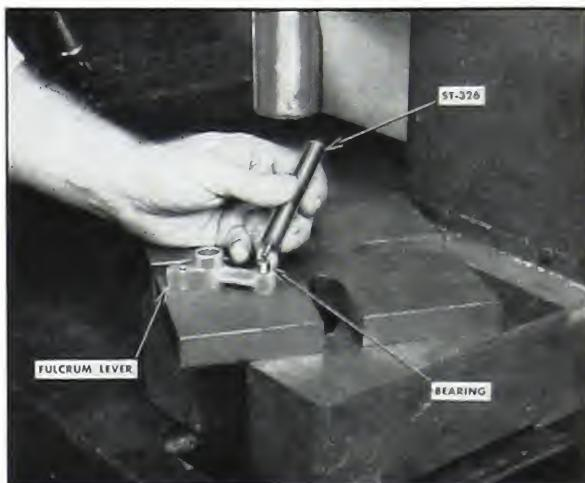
Assembling link pin needle bearing to fulcrum lever
